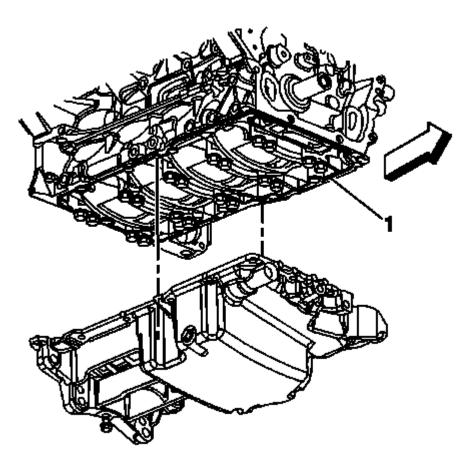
Oil Pan Courtesy of GENERAL MOTORS COMPANY
